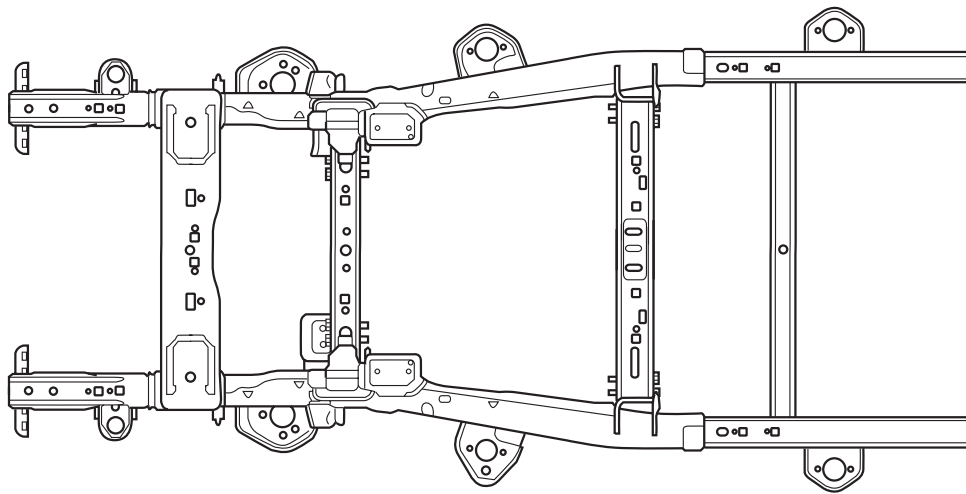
TYPICAL ASSEMBLED VIEW
